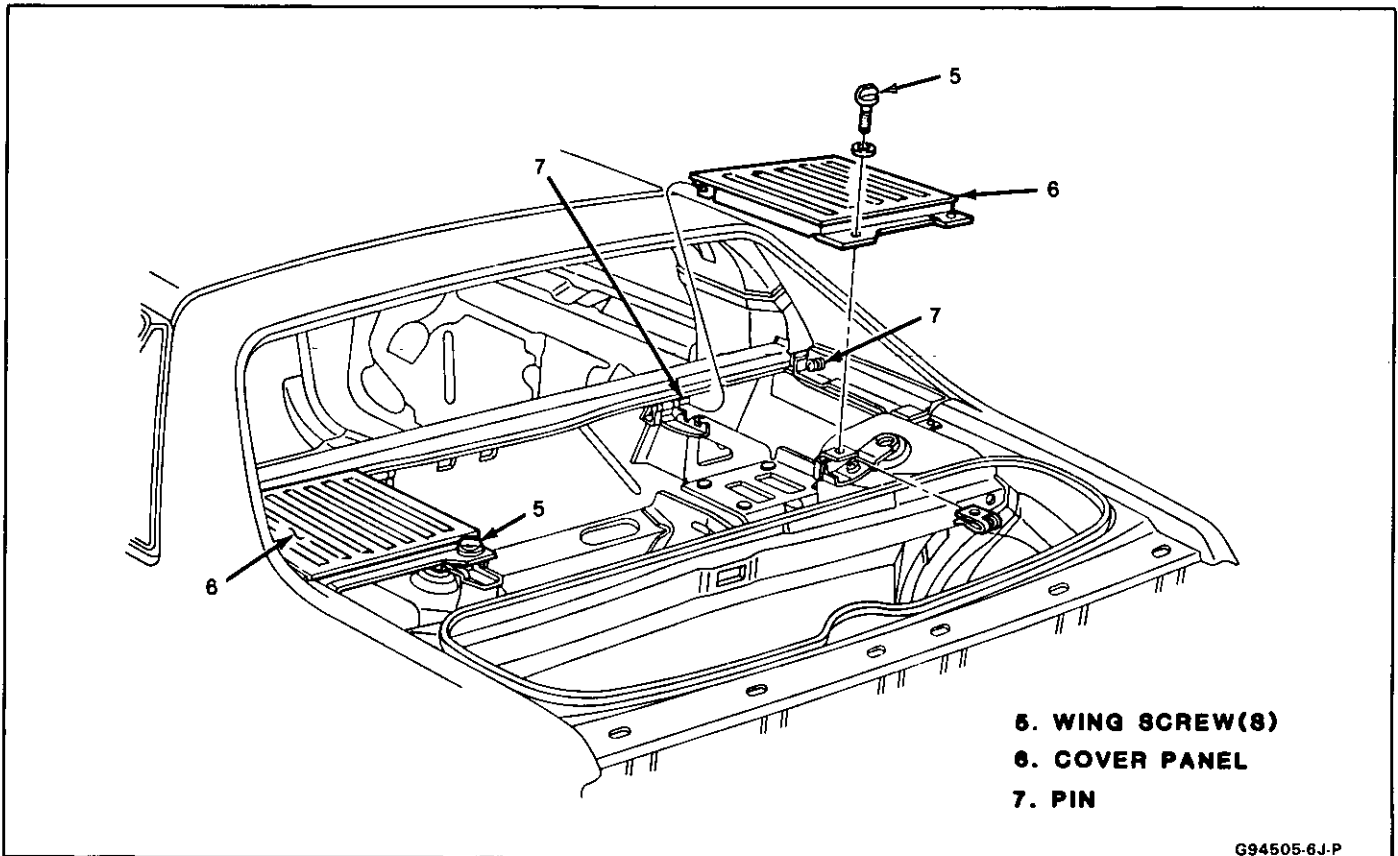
Installing Rear Compartment Side Panel Cover - 37 Style Shown, 97 Style Similar
